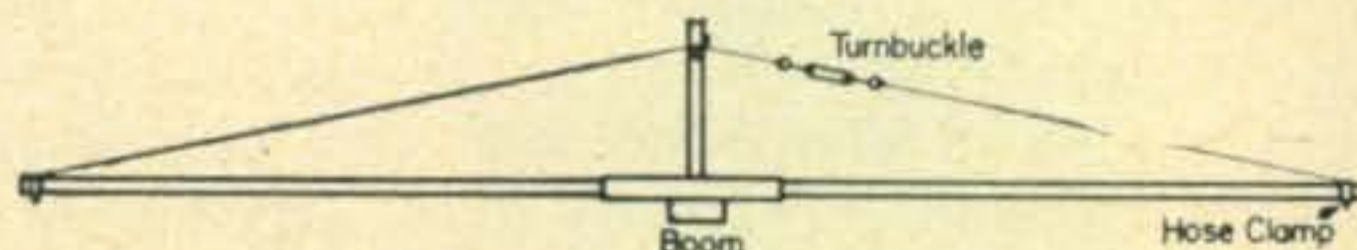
To prevent boom sag a 2' length of 1/2" steel tubing was welded to the side of the boom mount. A 3" 1/4" diameter is welded to the top of the rod as a hook to support the 1/8" stranded steel cable. The tension is adjusted with the turnbuckle.
